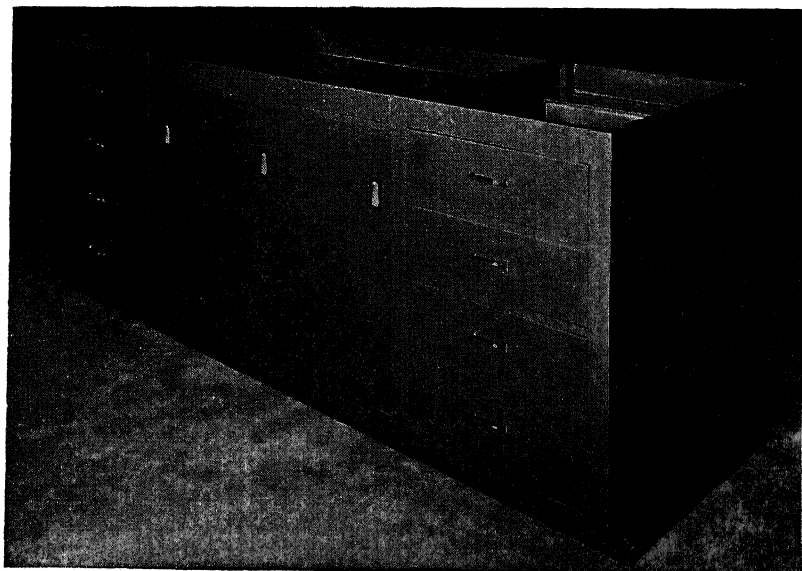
A laboratory cabinet built from galvanized sheets welded by the carbon arc process with tinned copper alloy feeder rod.
